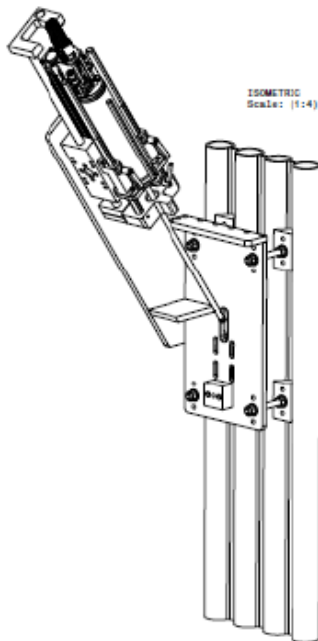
Mounting flange and extraction system mounted on the boiler wall.
